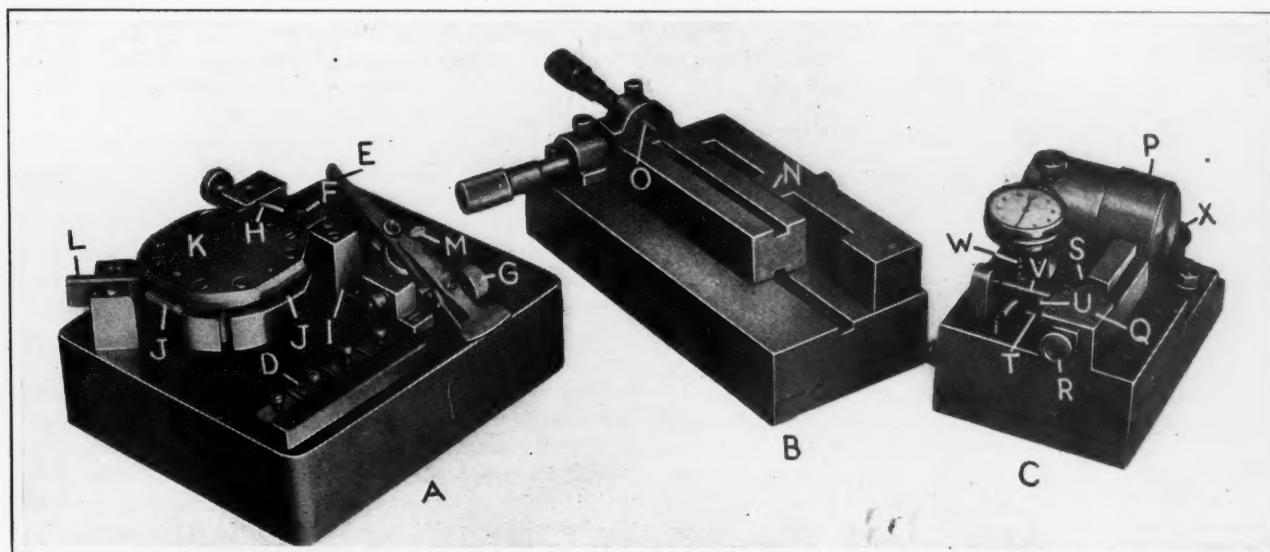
Group of Master Gages used in inspecting the Various Types of Pipe Thread Chasers
